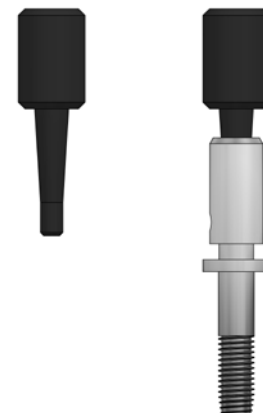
T-Handle and Stereotactic Driver (left); Driver Inserted into AXiiiS-CMB (right)
